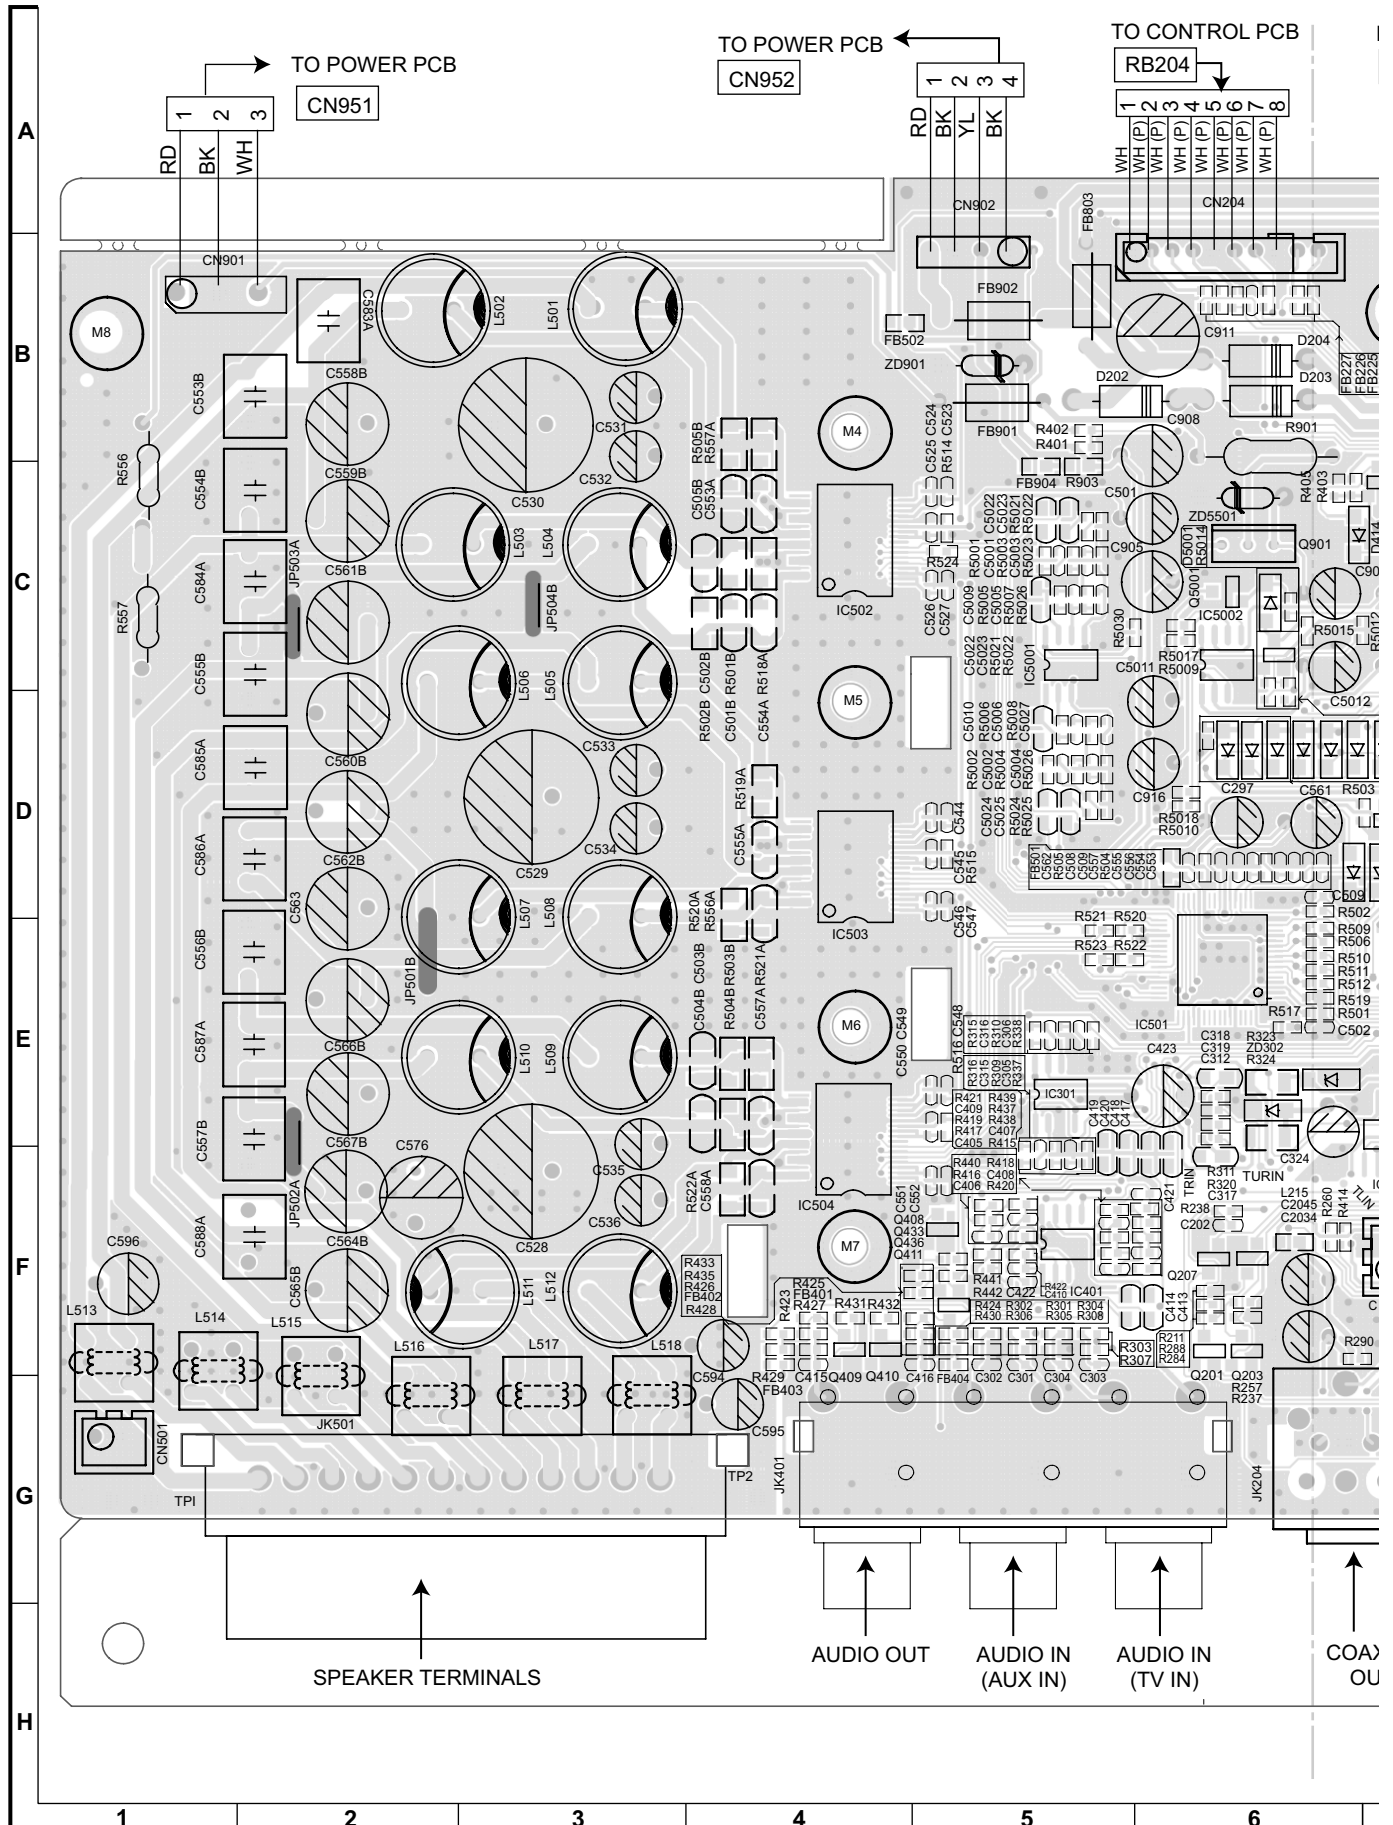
WIRING SIDE OF MAIN PCB (TOP VIEW) (1/2)
